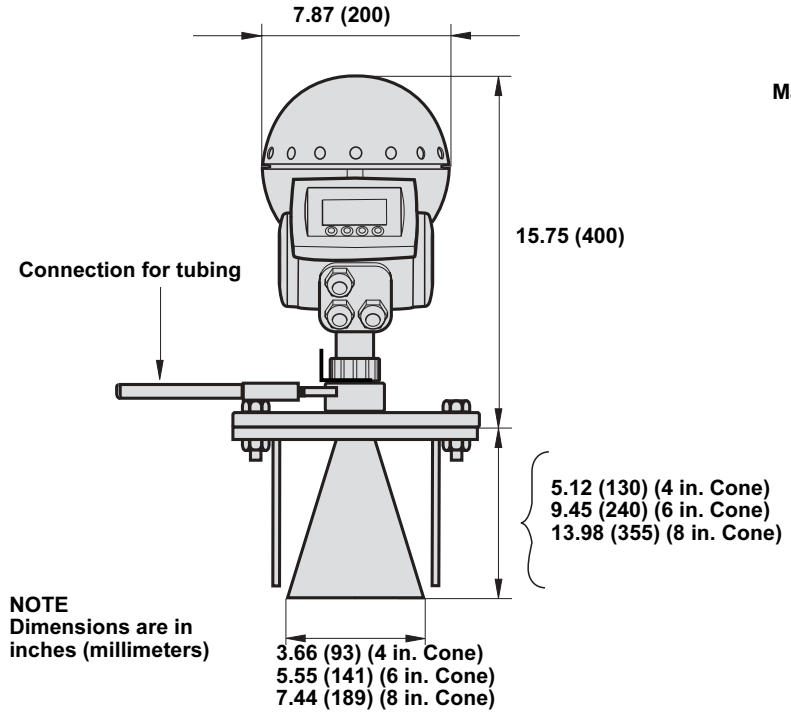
Extended Cone Dimensions for Stainless Steel Flange
